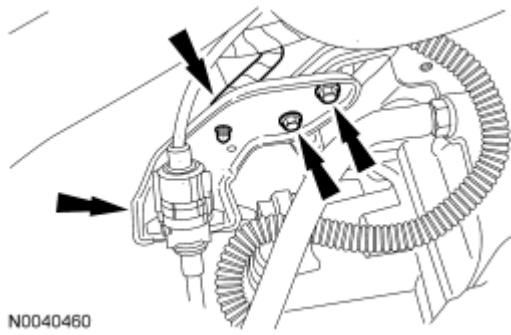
Locating Selector Lever Cable, Bracket And Bolts
